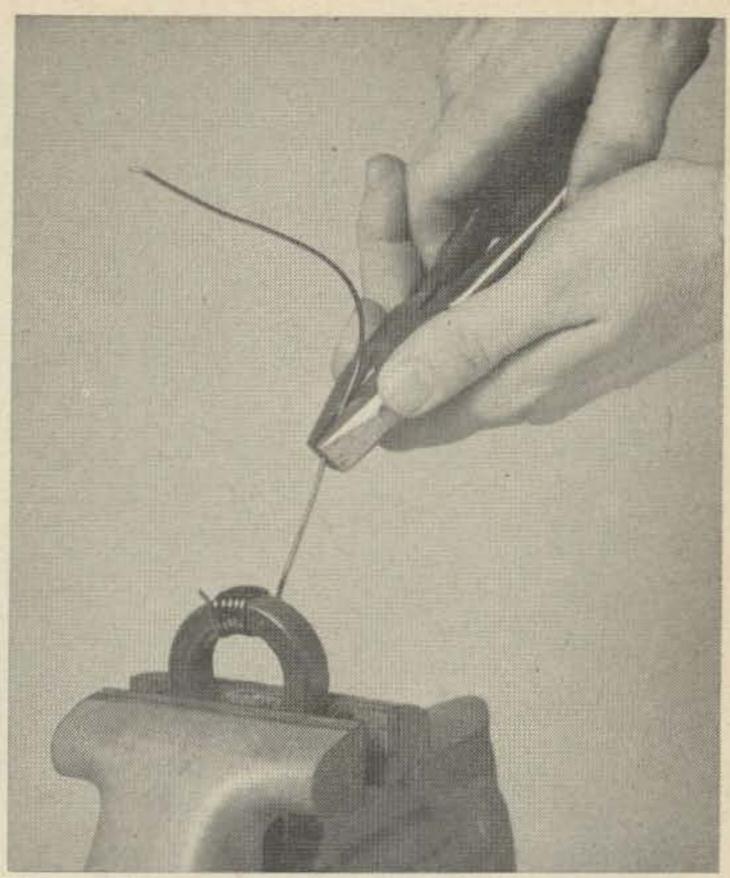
How not to wind your toroidal coils! The fragile core is sure to break if heavy wire is pulled taut with pliers. When winding toroids, the core should be hand held, and the wire pressed into place with your thumb.
